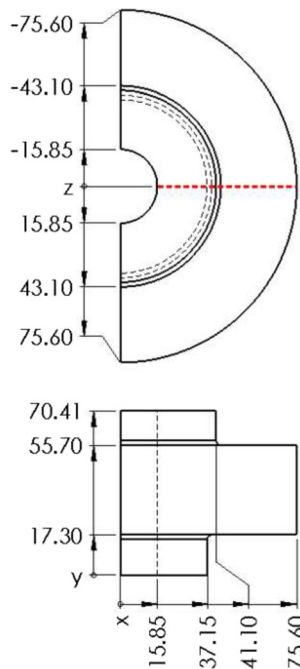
Nickel disk forging dimensions and measurement location (dimensions in mm)
